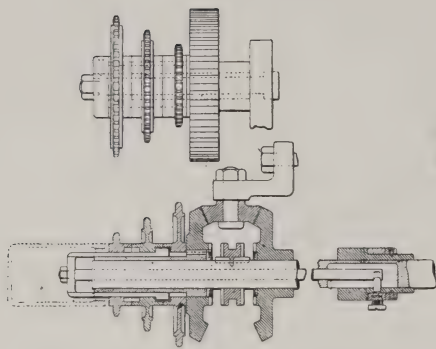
PLAN OF ROLLER-CHAIN FEED-GEAR SHOWN IN FIG. 32.
